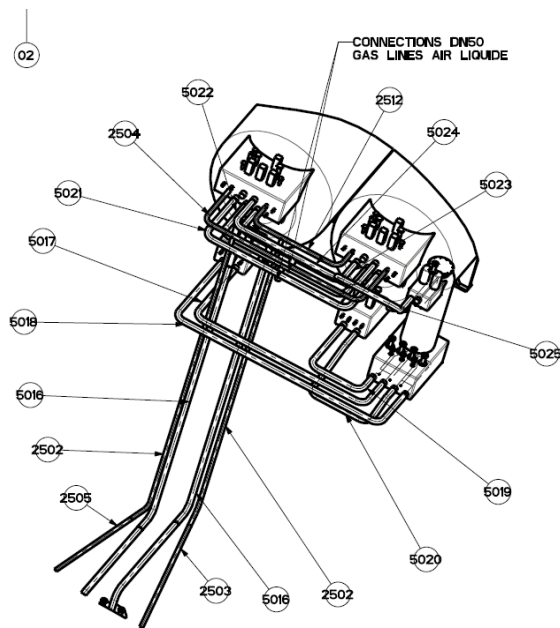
Details of the connections of gas line AIR LIQUIDE
